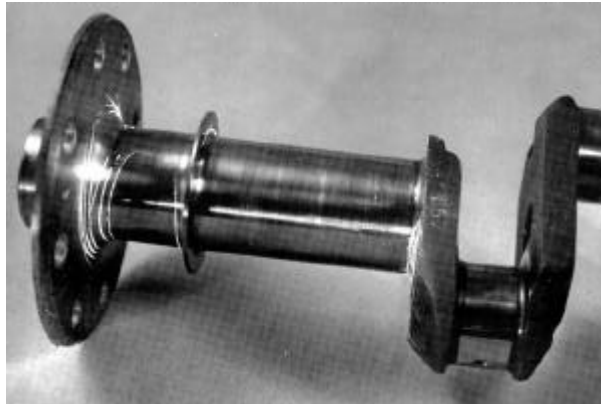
Fluorescent Magnetic Particle Indications of Cracks in Crankshaft of Small Aircraft Engine Damaged in Plane Accident.
